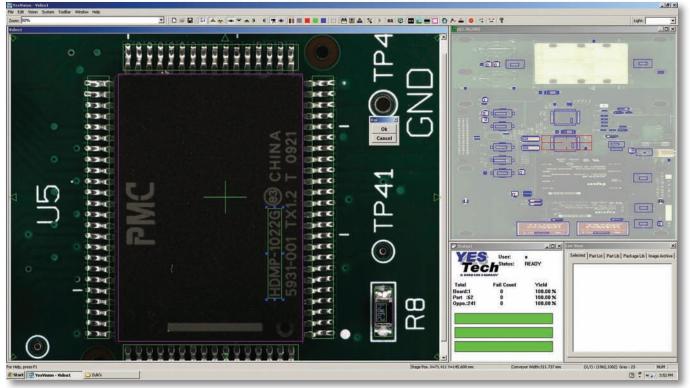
A 0603 package under AOI inspection process used to train the AOI machine. Image also shows difficulty of inspecting this small device.
